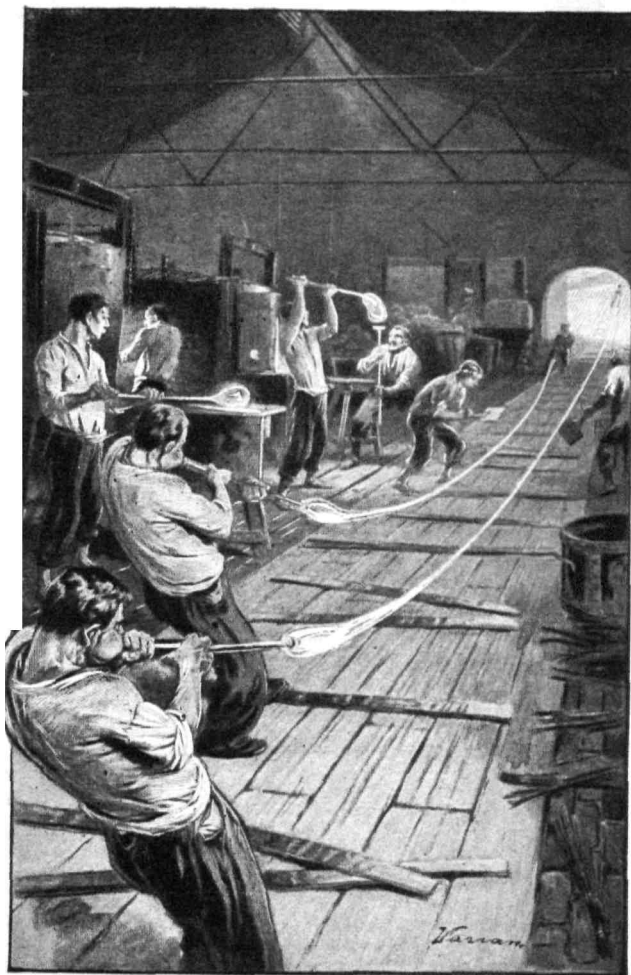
BLOWING AND DRAWING THERMOMETER TUBES
